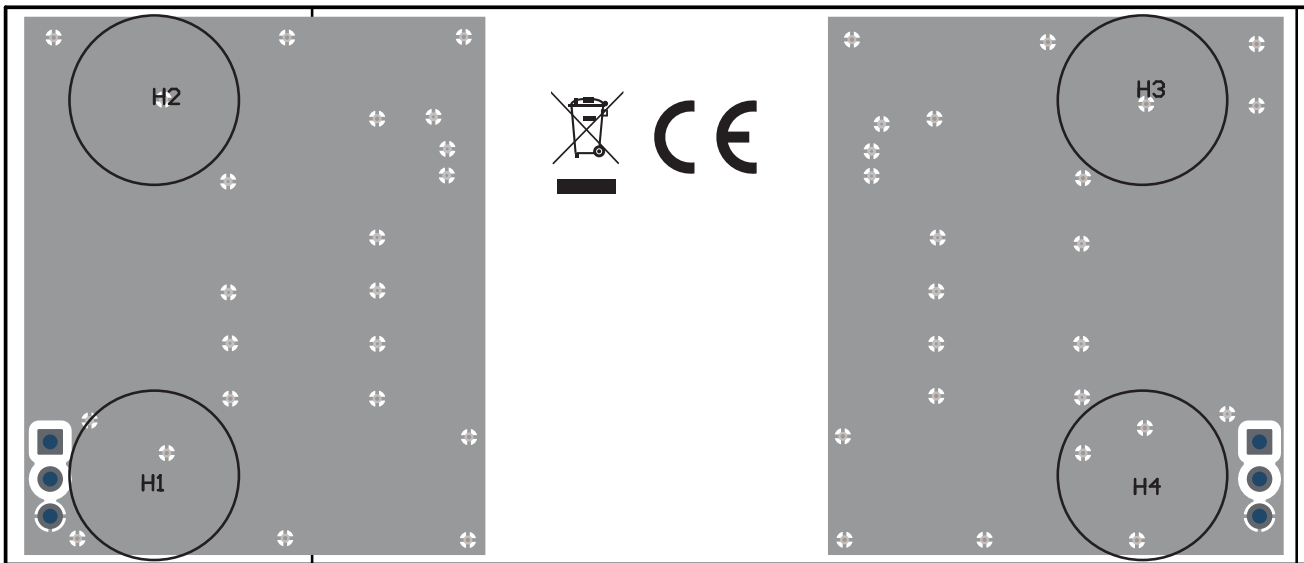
ISO7741UDUWEVM PCB Layout - Top
